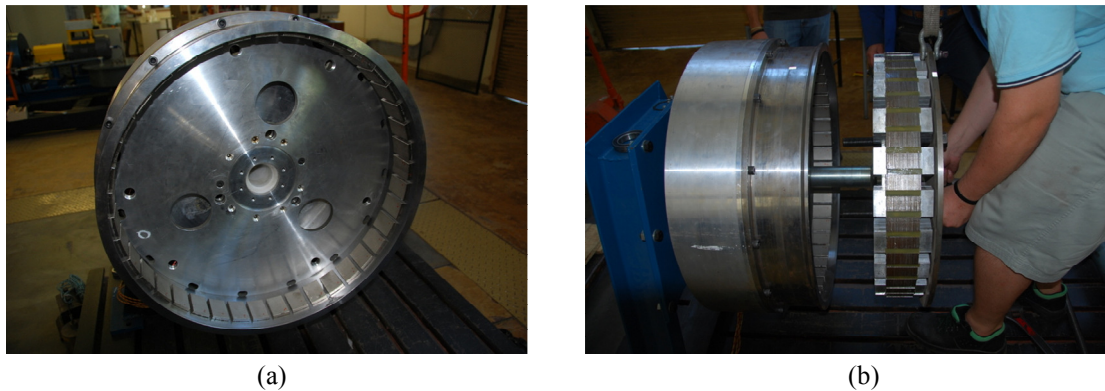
SS-PMG being assembled on the test bench with (a) SL PMSG with PM-rotor side of slip-PMG mounted to its front and (b) slip-rotor being shifted into position.
